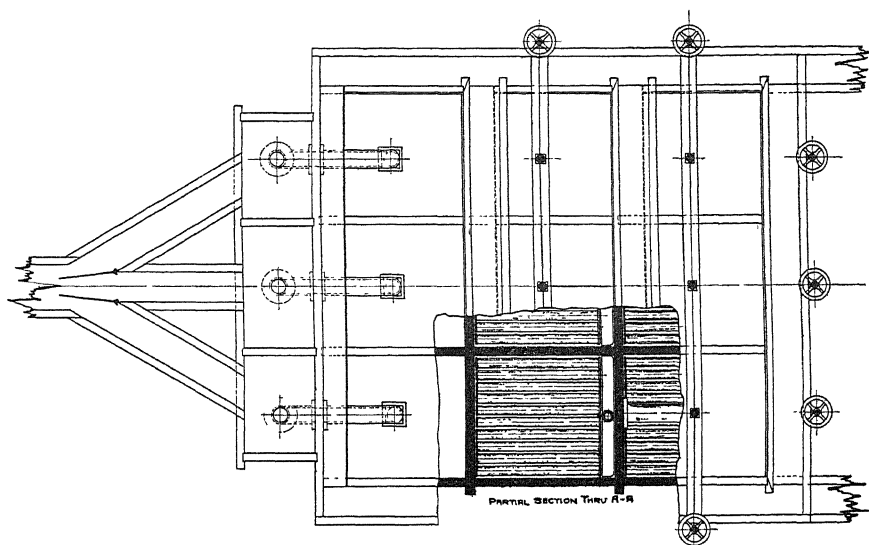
PLAN OF C-B FLOTATION MACHINE.
